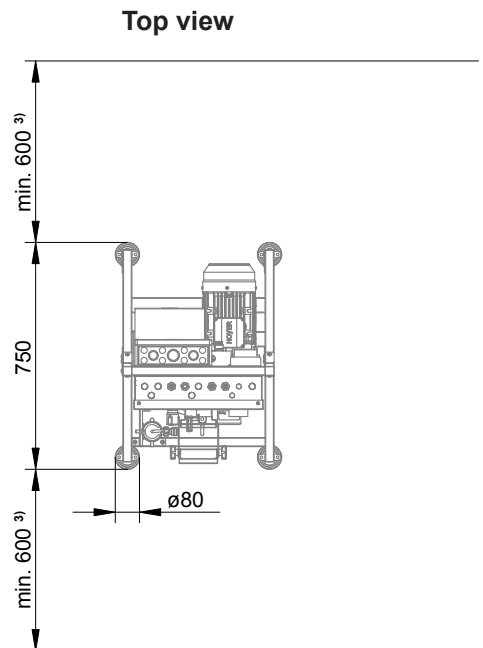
System dimensions Vita Power RO-UV-HP (dimensions in mm)
